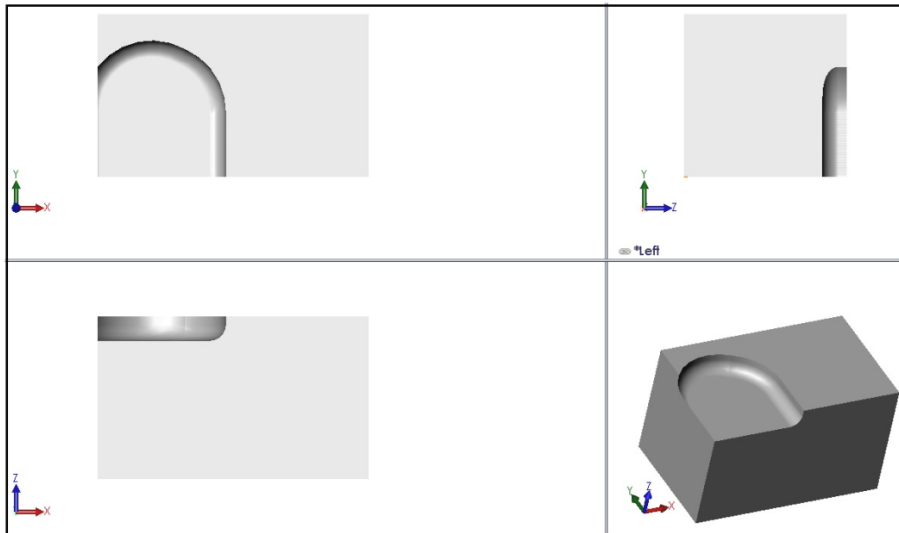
Output for tool path in Annexure 1 by Boolean operation.
